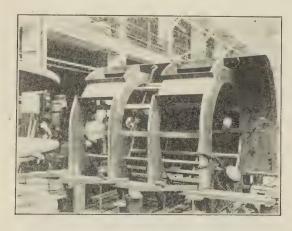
9500-Kv-a., Turbo Generator Showing Fabricated Frame Construction
